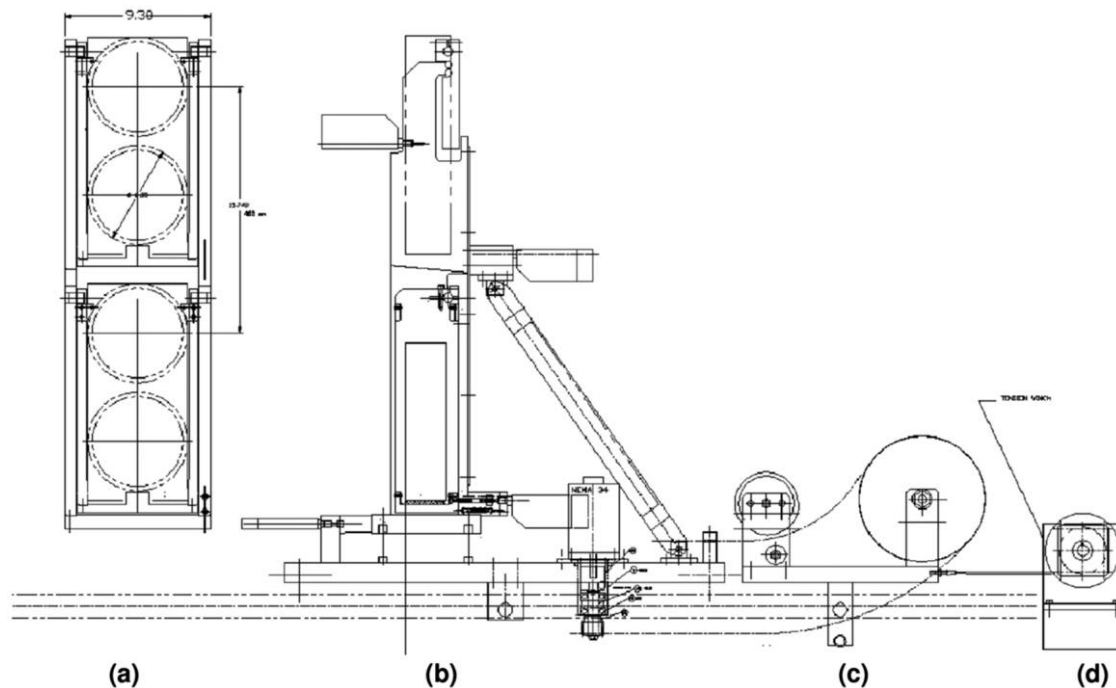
Schematic of the long delay line cart. From *left to right*: (a) front view showing the beam footprints (only the top mirror position is used); (b) side view of the main cart with its tractor motor; (c) the idler cart, shown for the LDL at the back; (d) the tensioner motor.
